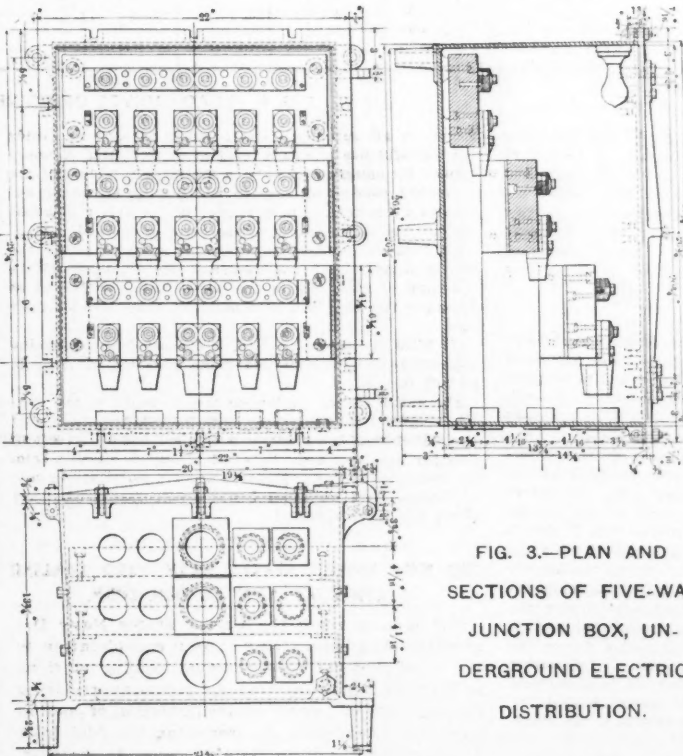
PLAN AND SECTIONS OF FIVE-WAY JUNCTION BOX, UNDERGROUND ELECTRIC DISTRIBUTION.
